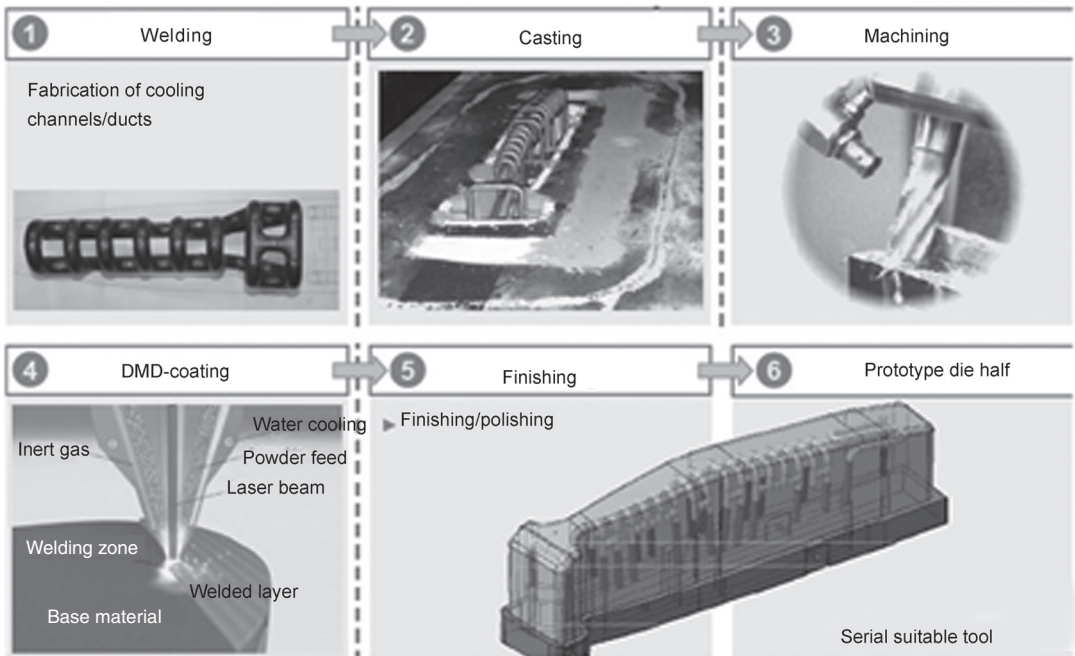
Steps involved in casting cooling ducts. DMD, direct metal deposition. Source: Ref 7.34
